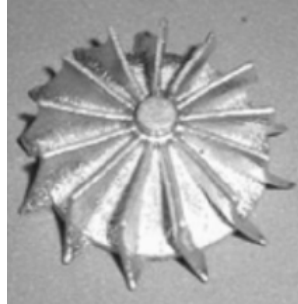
Complex AlSi316L parts fabricated by SLS/HIP
